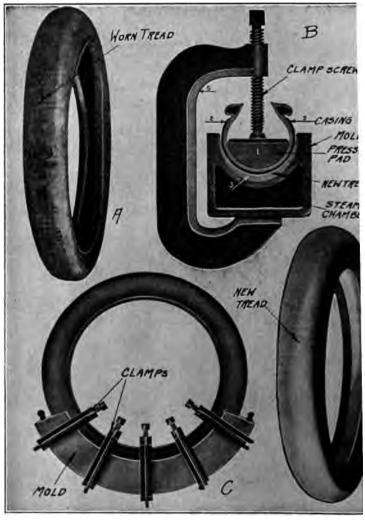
Showing Molds, Clamps and Pad Used for Retreading a by the Dry Cure Process.
